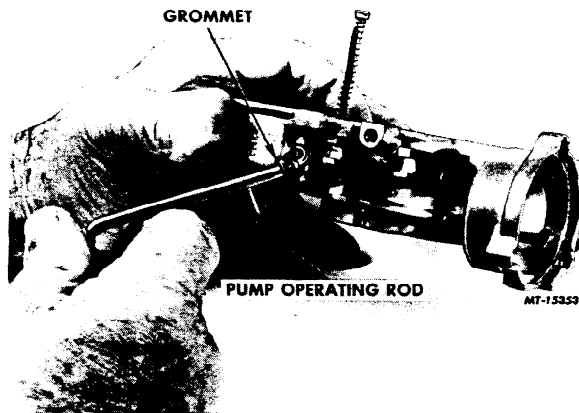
Remove or Install Accelerator Pump Operating Rod and Grommet
